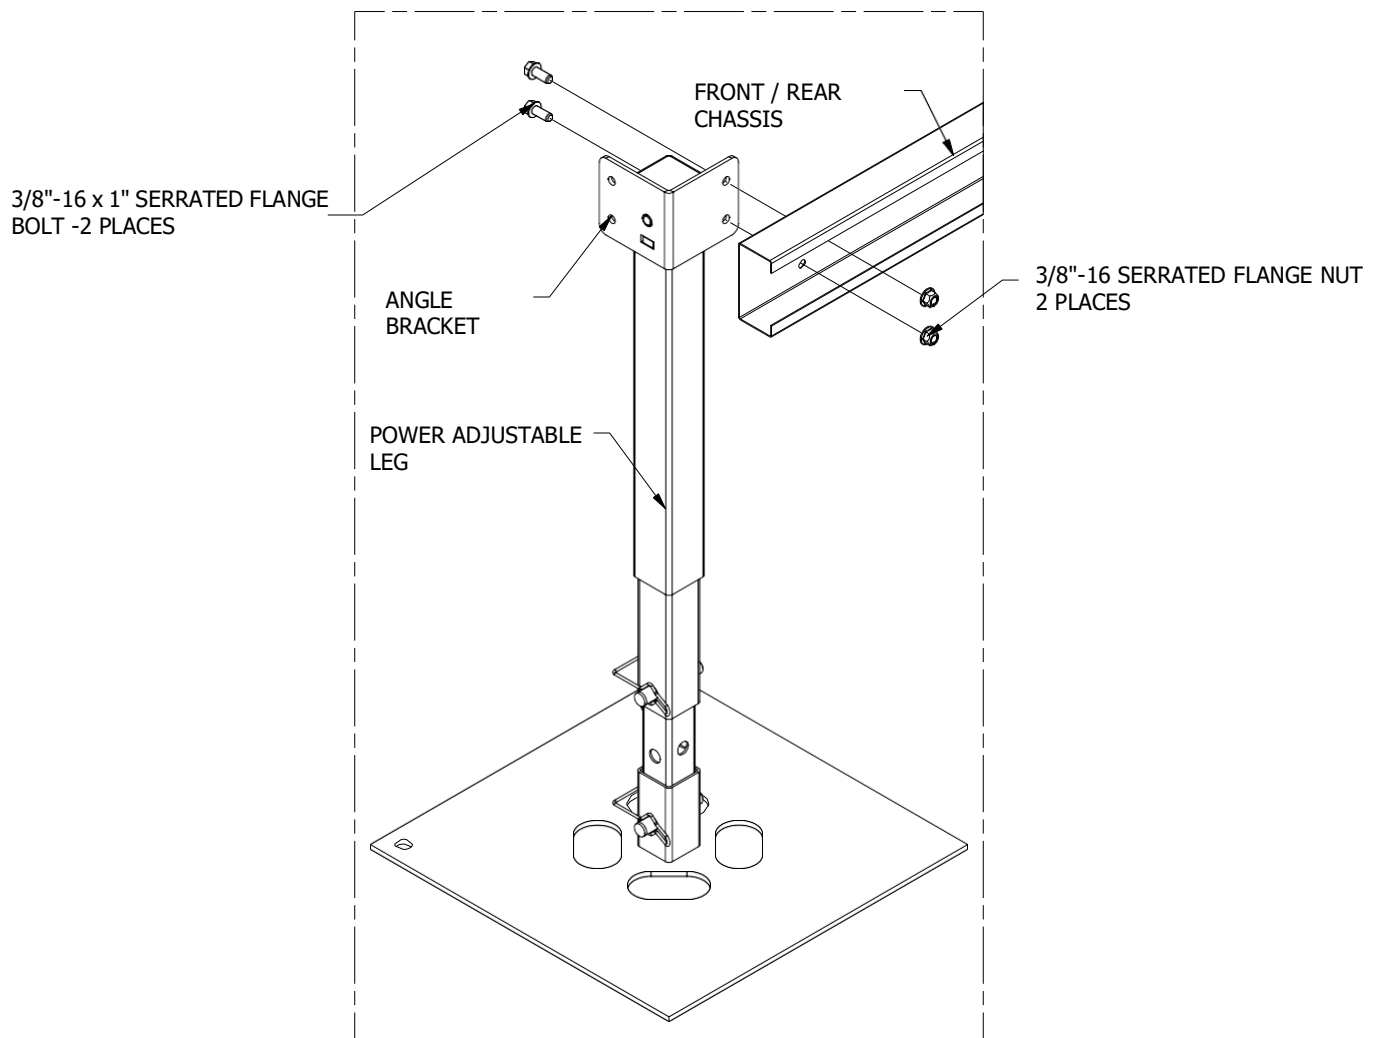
Front/Rear Chassis to Angle Bracket on Power Adjustable Leg
